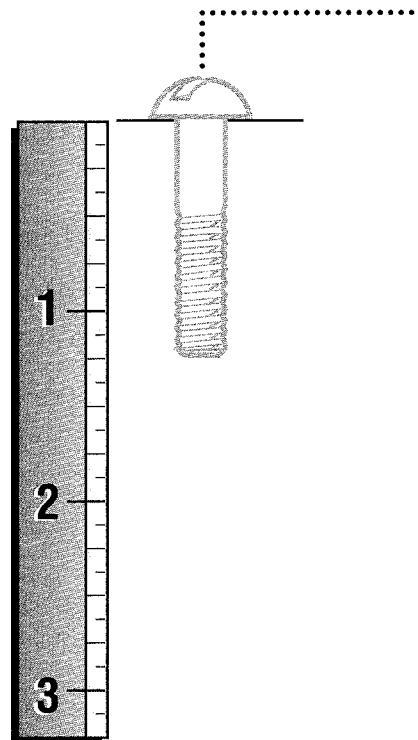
Place screw on top of template and measure distance between bottom of screw head and tip of screw.
